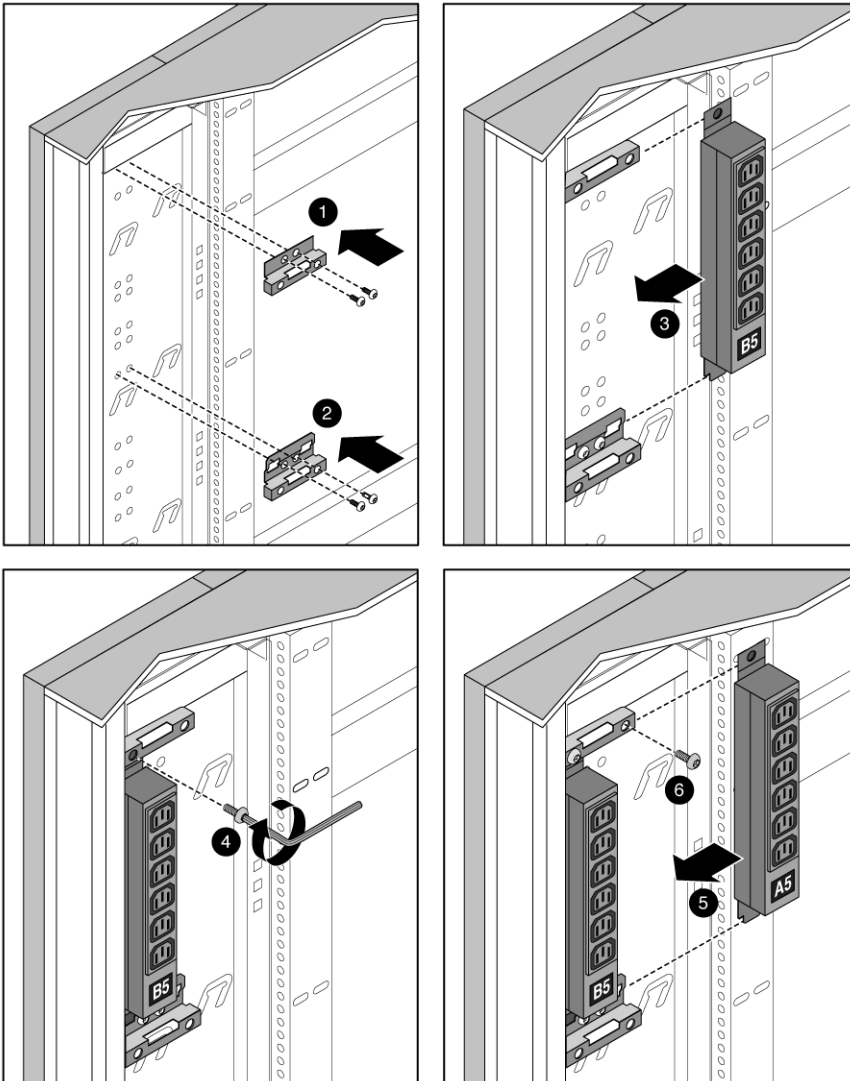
Installing the Power Strips, Brackets, Cables, and Covers
